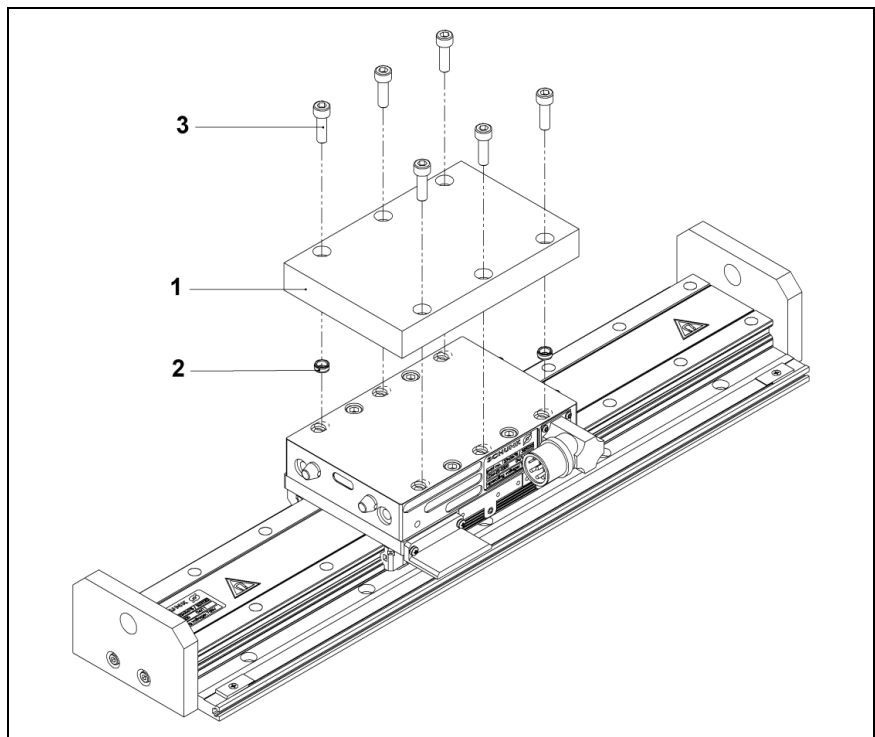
Assembly surfaces of the linear motor drive type LDF
